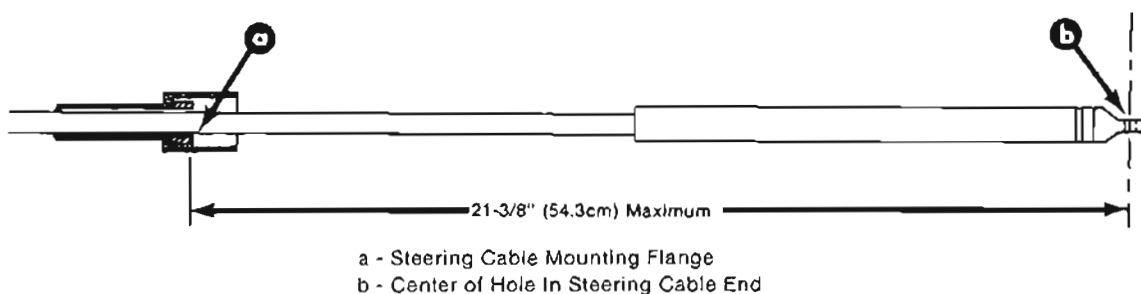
Checking Steering Cable End Dimension (Cable Fully Extended)
